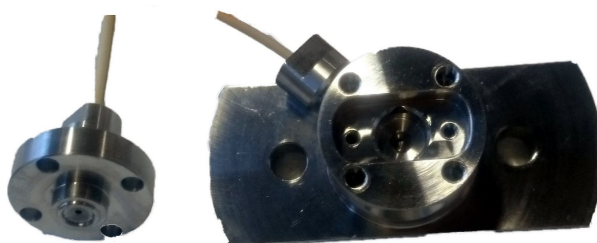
In this figure the upper (left side) and lower (right side) parts of the osmotic pressure cell housing are shown. The lower part contains two small threaded holes to screw the polycarbonate cell on the housing and four bigger threaded holes to connect the upper with the lower housing part. The upper part is connected to the pressure system and the lower part to the atmospheric pressure in the lab using a high pressure hose.
